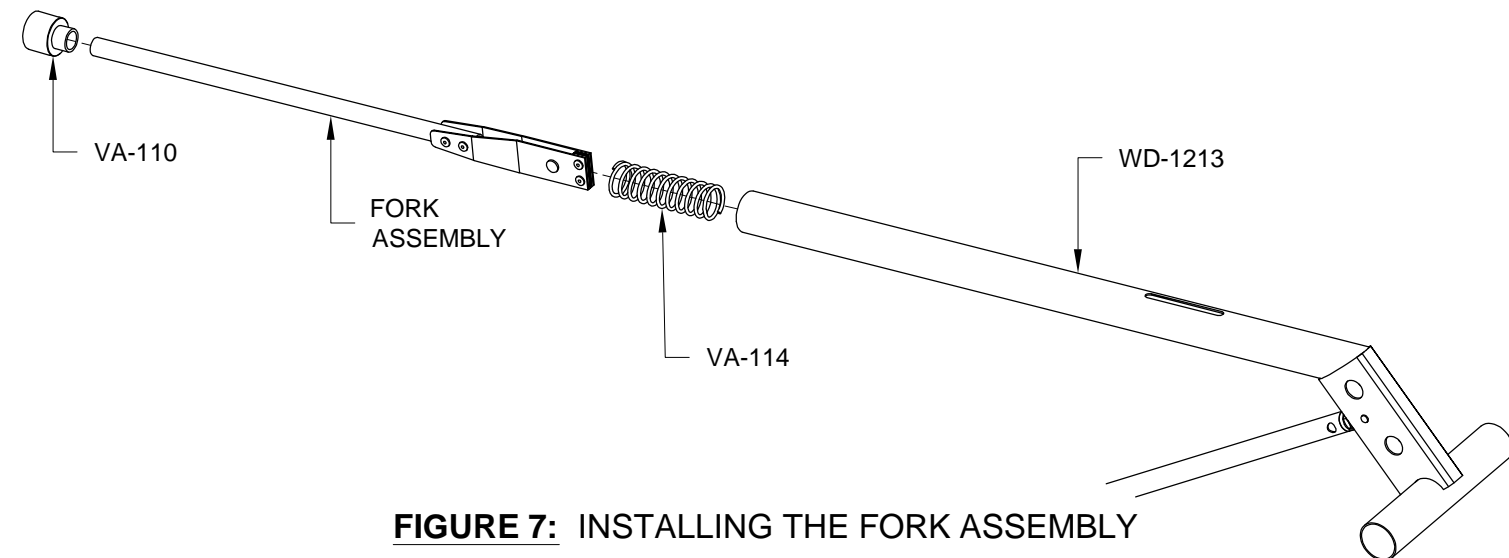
INSTALLING THE FORK ASSEMBLY
